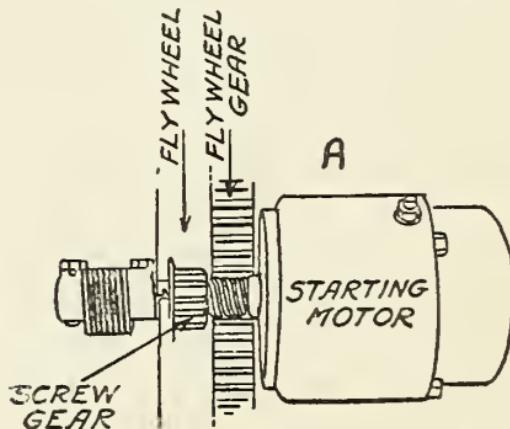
A. The electric starter complete. Starter gear out of mesh but ready to be automatically screwed into the fly wheel gear.
